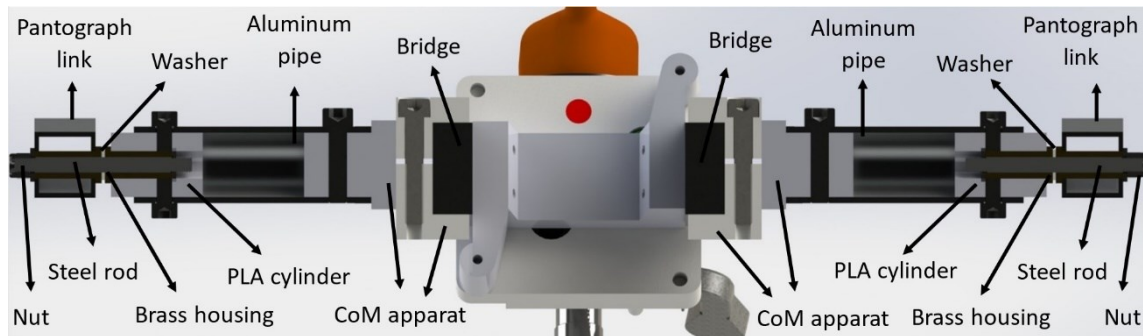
Cross section view of the linear carriage and pantograph connection
